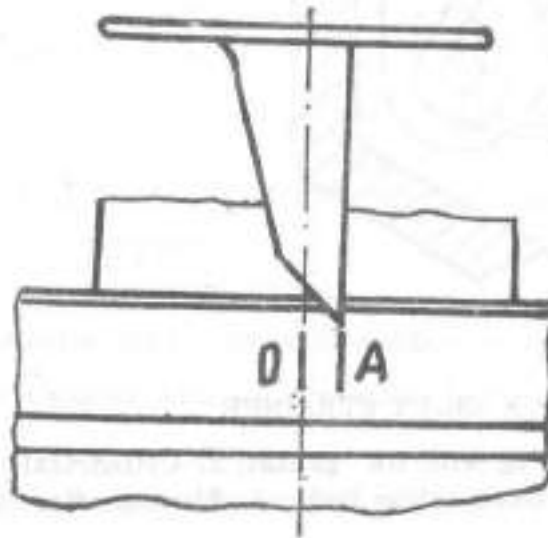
ADJUSTING IGNITION TIMING BY ARO L-25 ENGINE
